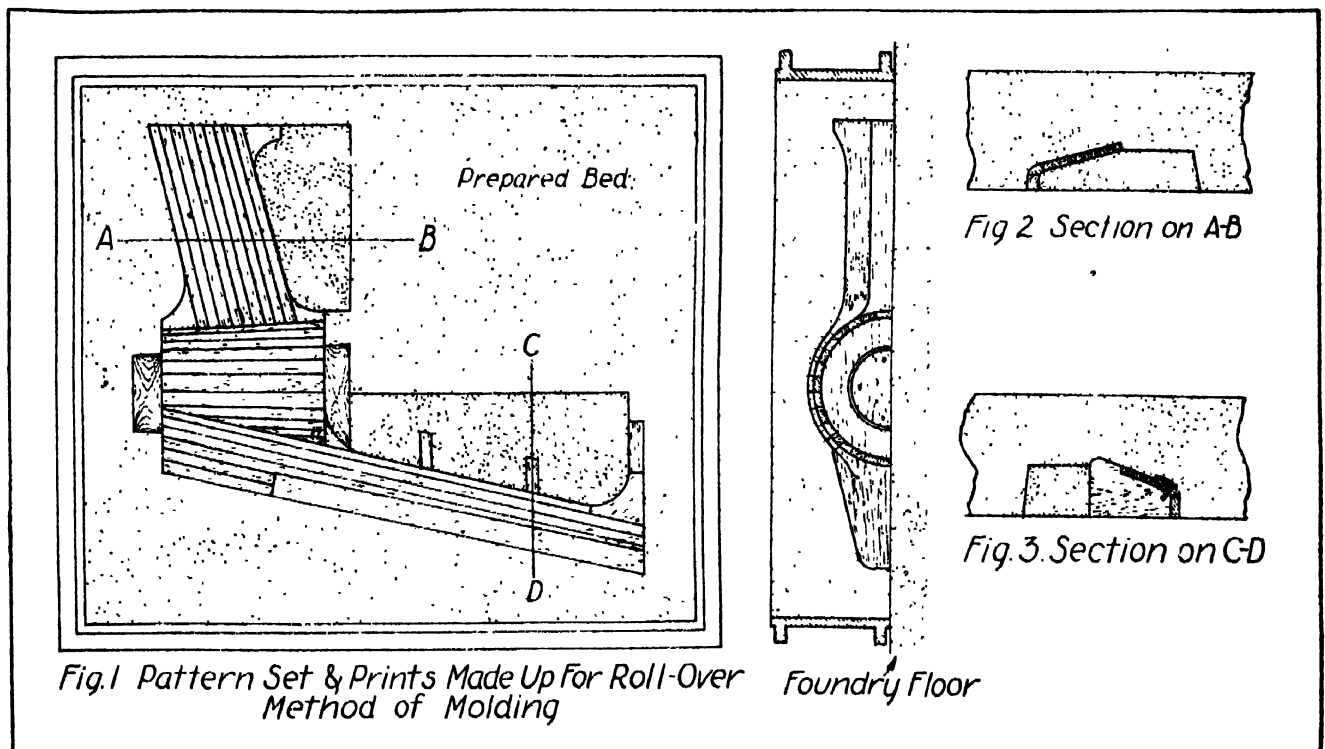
PATTERN SET AND PRINTS MADE UP FOR ROLLOVER METHOD OF MOLDING FIG. 2 - SECTION ON A-B FIG. 3 - SECTION ON C-D
